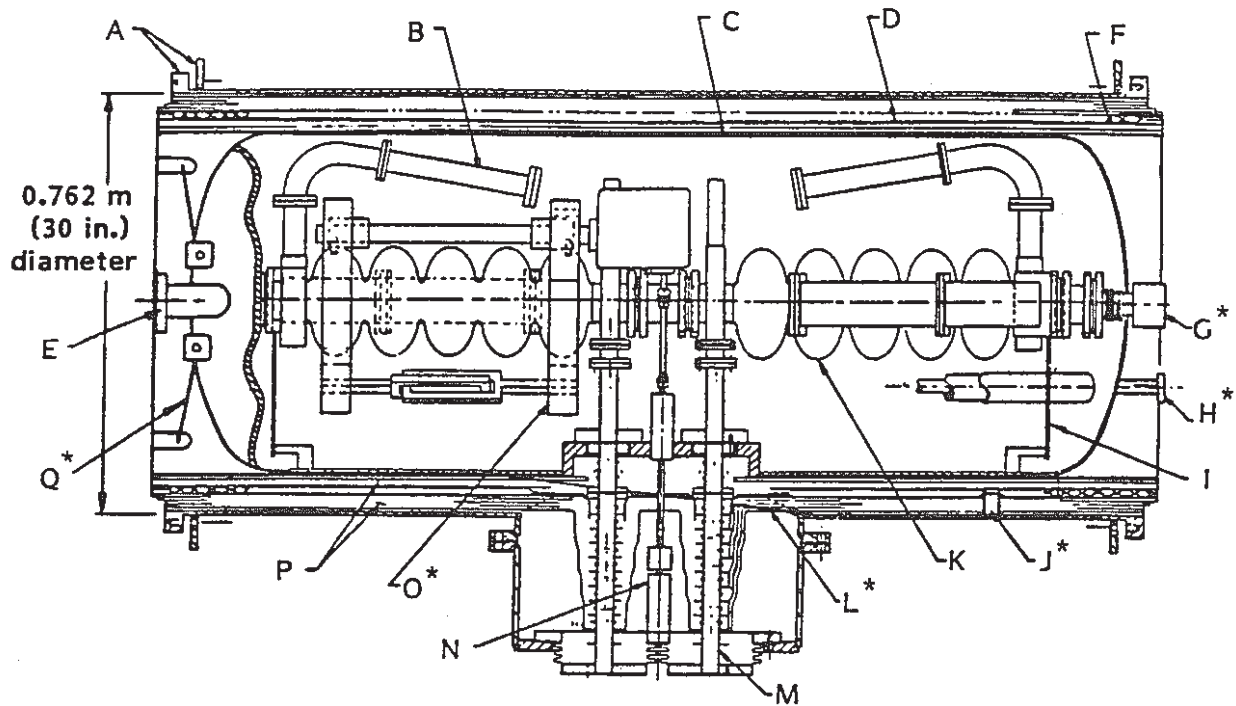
Top view of a CEBAF cryo-unit. Asterisked items shown only once. (A. Vacuum shell flange and captured seal ring; B. HOM load; C. Inner magnetic shield; D. Outer magnetic shield; E.* 2 K return helium connection and helium vessel; F. 40 to 60 K radiation shield; G.* Beam-pipe flange surface on end valve; H.* 2.2 K helium supply line; I. Outboard cavity support; J.* Shield support bumper; K. Cavity; L.* Axial support; M. Fundamental waveguide; N. Rotary feedthrough; O.* Tuning mechanism; P. Superinsulation; Q.* Helium vessel support rod.)
